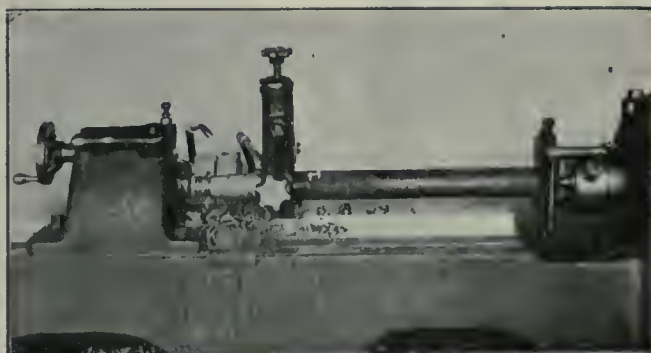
READY TO START CUTTING WITH THIRD TOOL.
